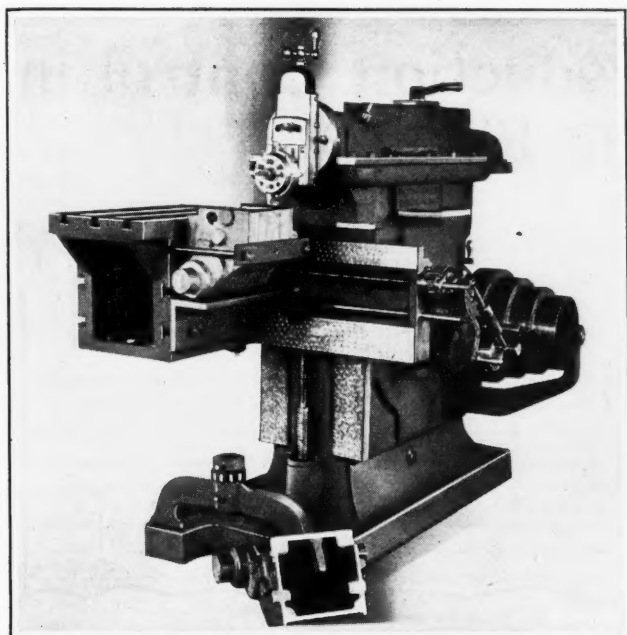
Shaper equipped for machining a Lathe Feed-box
